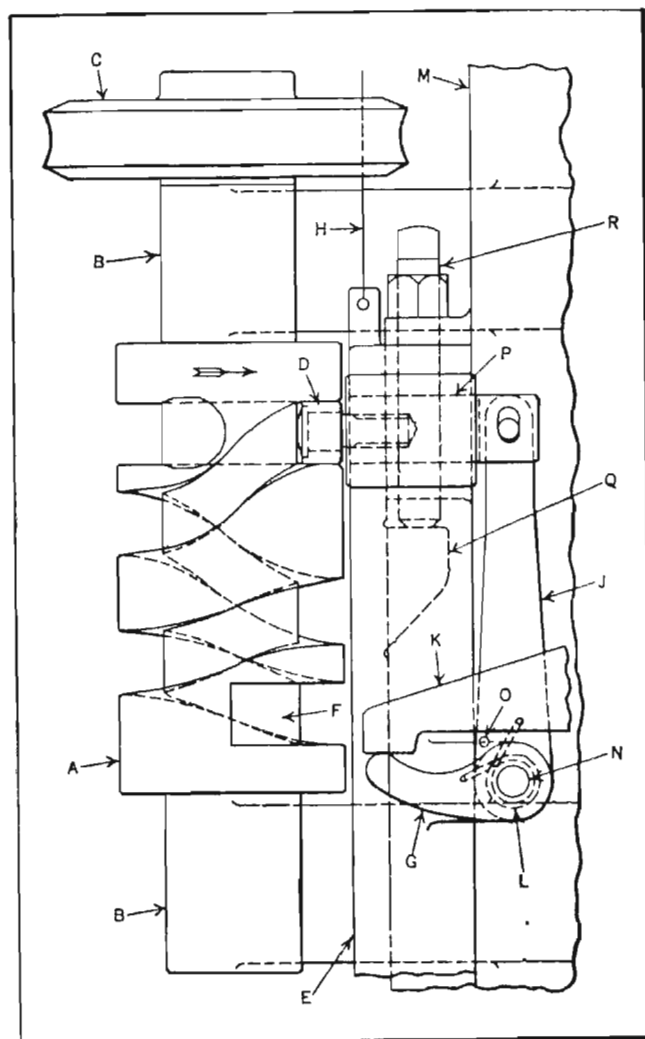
Rotary Cam in which Roll is Disengaged at the Bottom of the Stroke to Allow the Slide to be Returned Rapidly by a Counterweight. Re-engagement Takes Place at the Top of the Stroke
